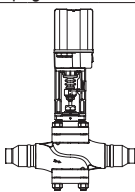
with butt weld ends and Pressure balanced plug
